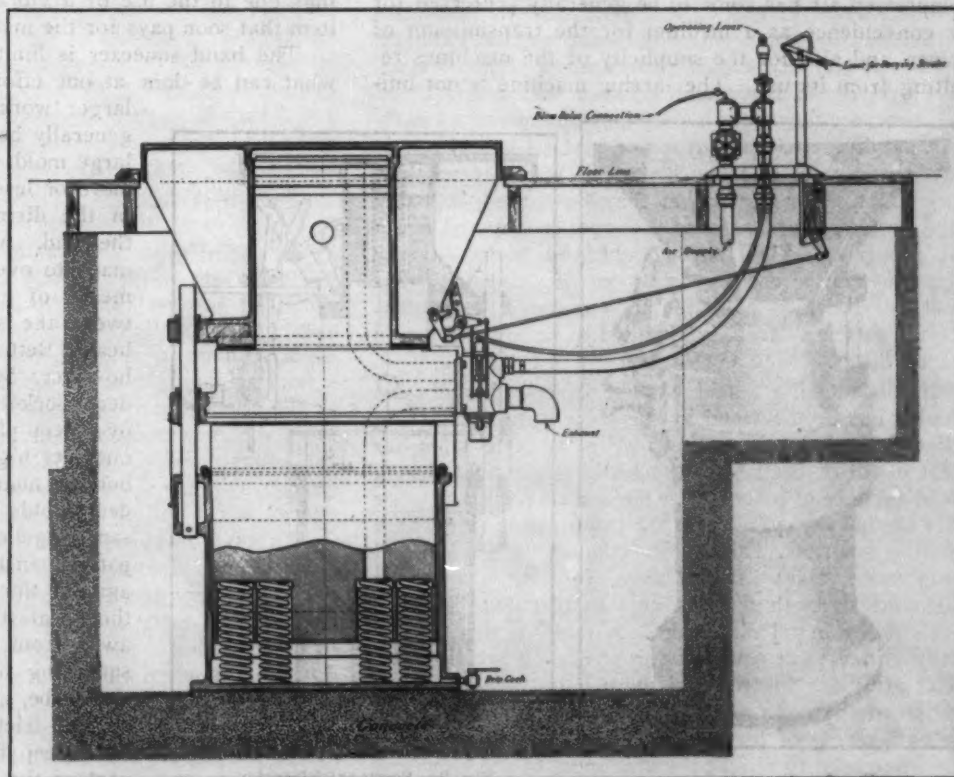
Sectional Elevation of a Machine Designed to Handle Molds Weighing 25 Tons.
